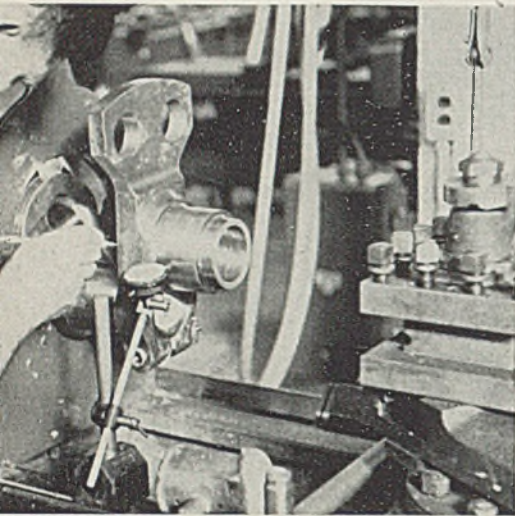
In this setup, an operator is inspecting the concentricity of a partially assembled crankshaft for a radial aircraft engine. The dial gage point is set against one of the main bearings at the right
